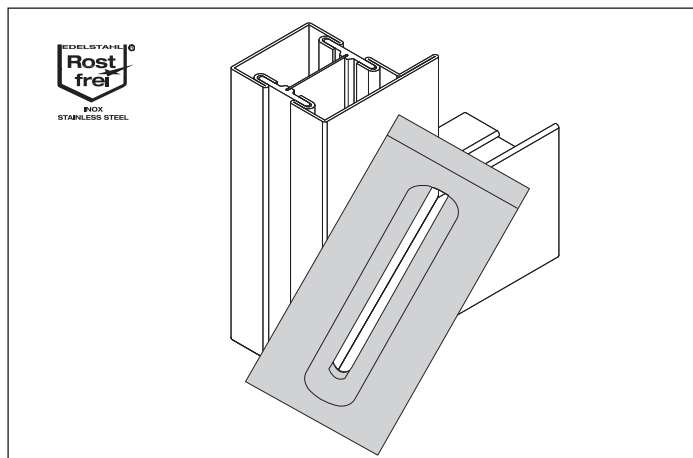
Use the copper welding gauge on the outside of the profile in the mitre area
